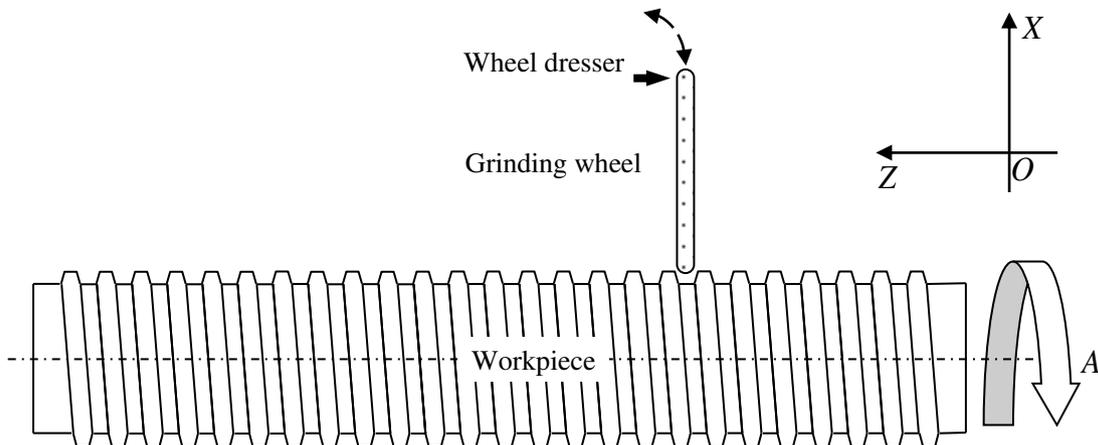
The lead screw workpiece, grinding wheel, wheel dresser and coordinate system in the CNC lead screw grinding.
